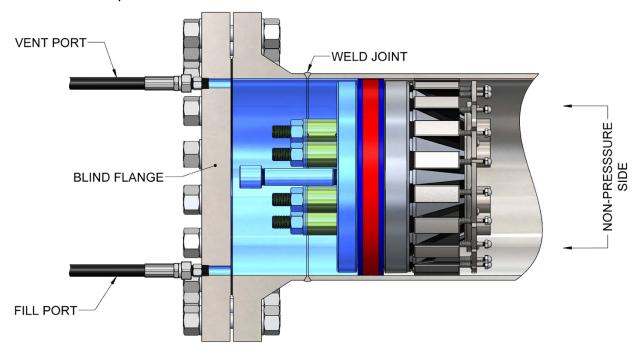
GripSafe Weld Neck Flange Hydrotesting
